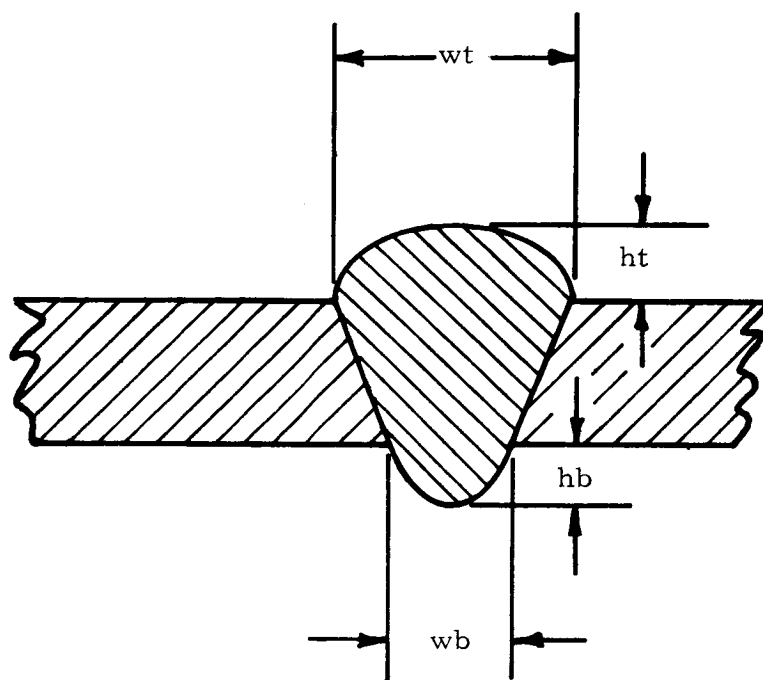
LOCATIONS USED FOR WELD MEASUREMENTS
